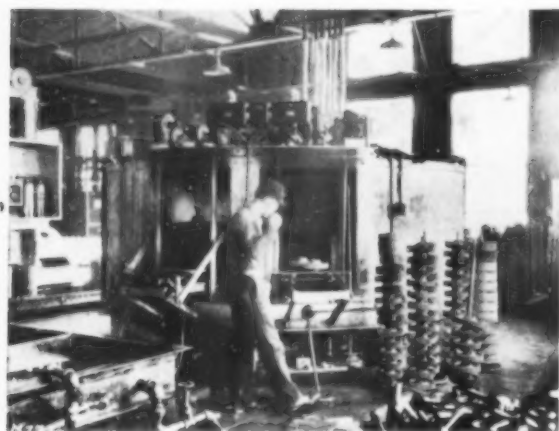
One of the two "Hevi Duty" Electric Rotary Hearth Furnaces, used for case and core refinement of carburised parts.
